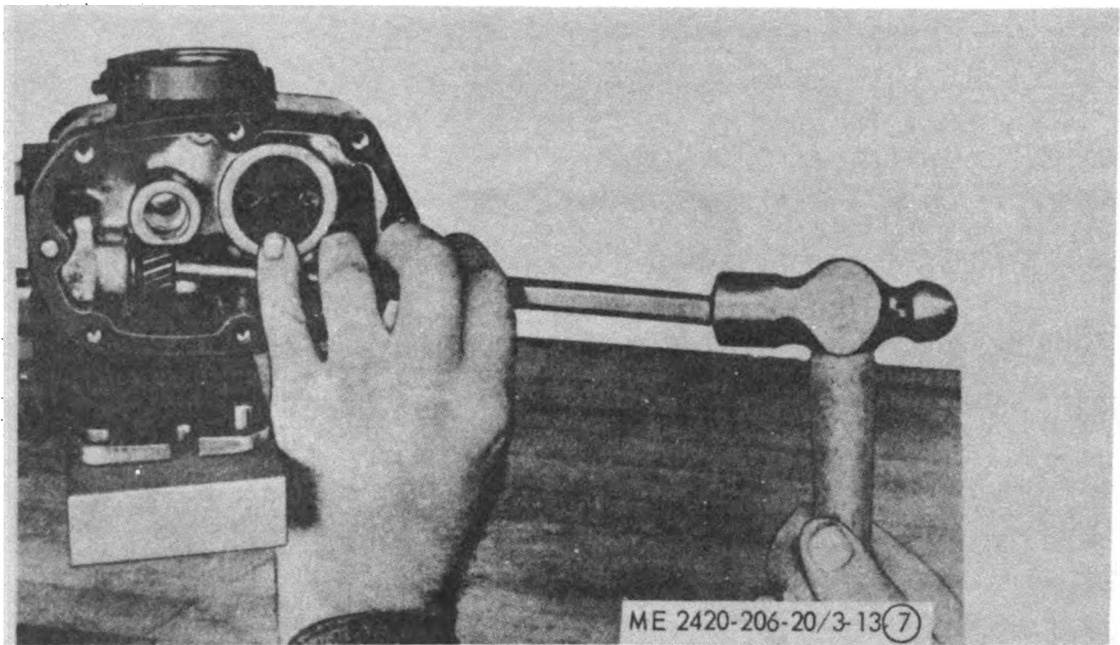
Driving tachometer drive shaft from cover (sheet 7 of 12).
